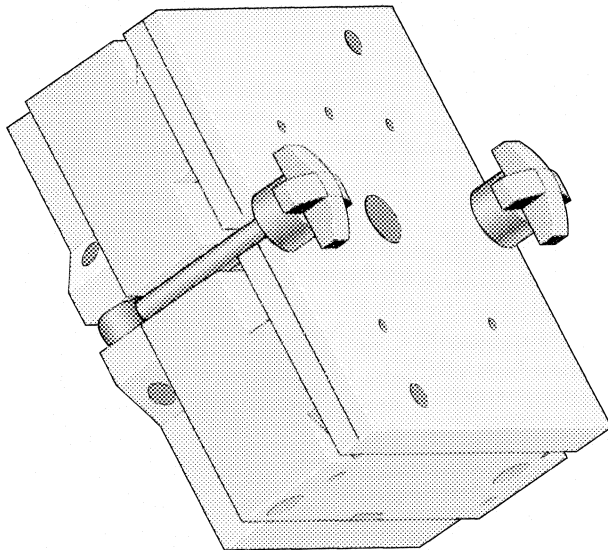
Jig Box Assembly with Hidden Lines Removed
